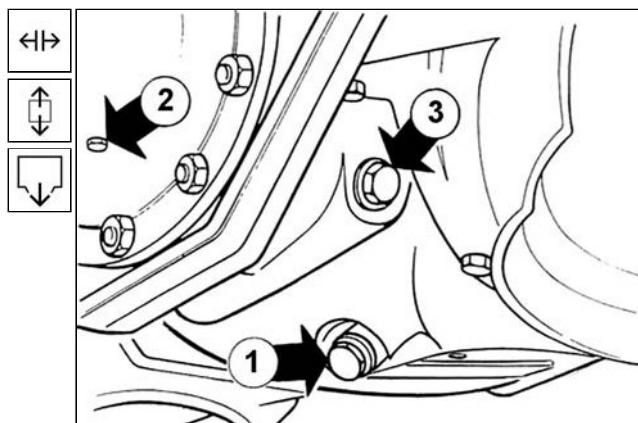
Filler, inspection and drain holes of the axle final drive and axle differential oil filling – removal
